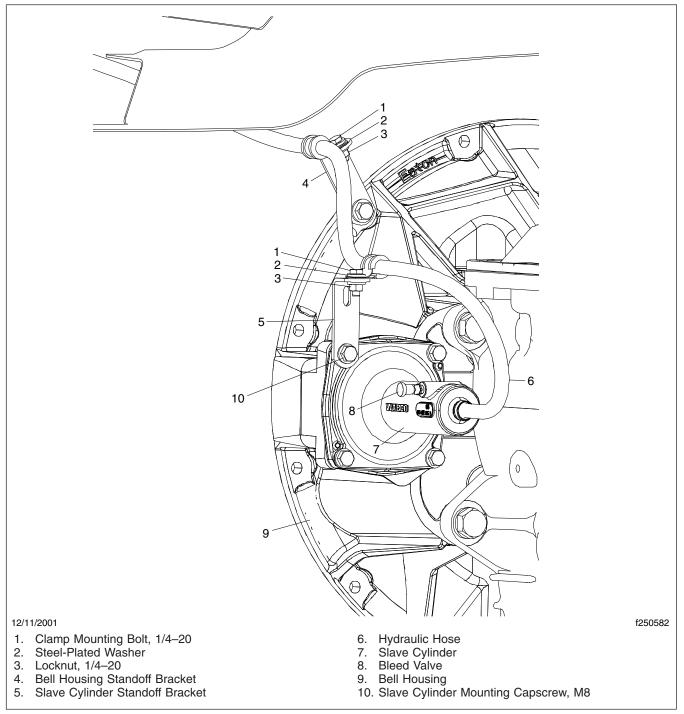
, Slave Cylinder, Hydraulic Clutch Control
